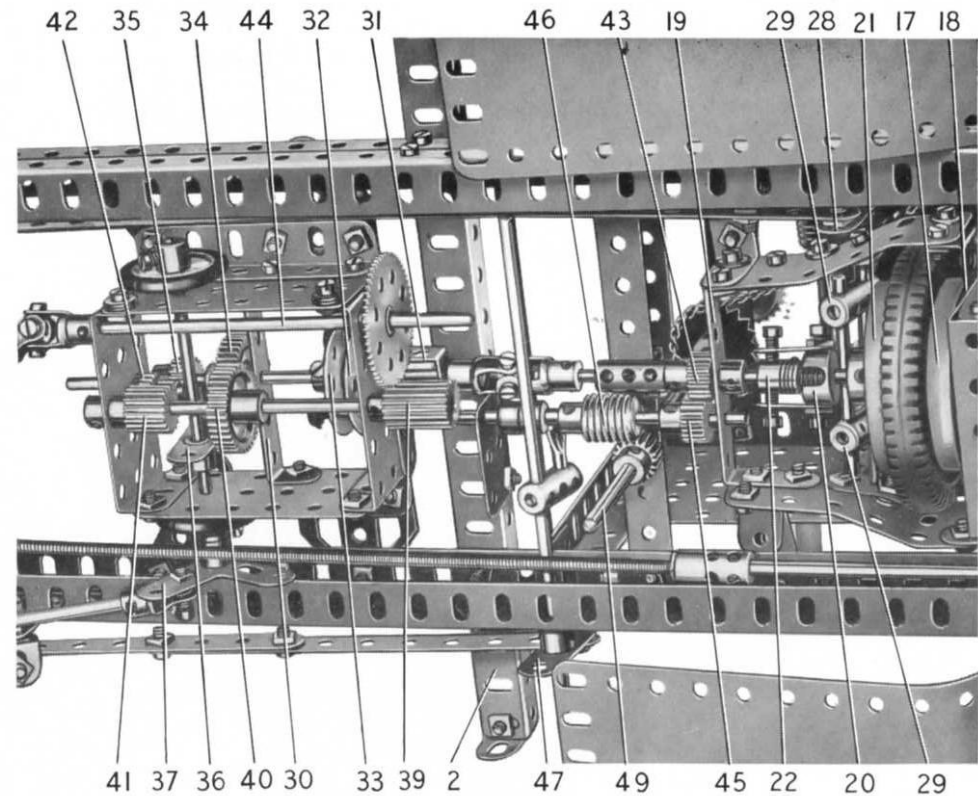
A close-up of the clutch and gear-box mechanisms of the Snow Loader
